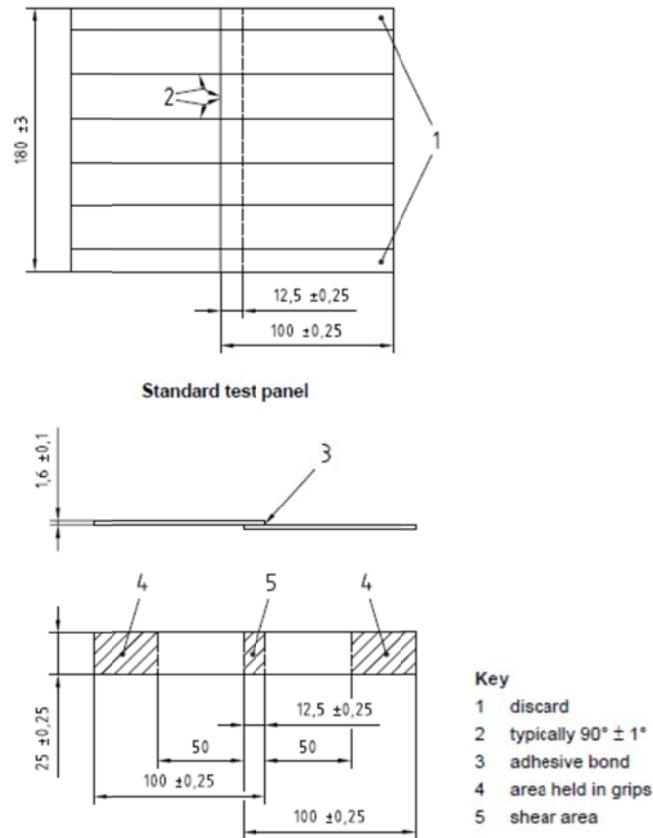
Shape and dimensions (in mm) of test panel and specimen.
